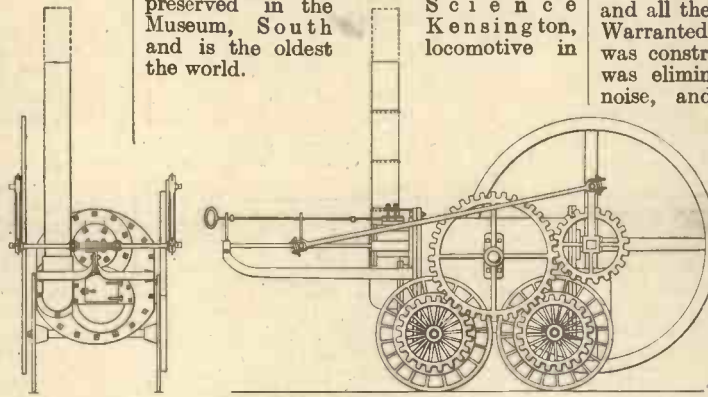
Copy of the Llewellyn drawing of "A Tram Engine," dated 1803.
